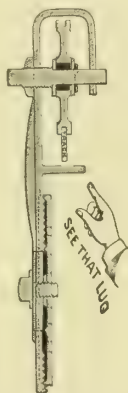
SECTIONAL VIEW OF WILBERN ADJUSTABLE DOOR HANGER
